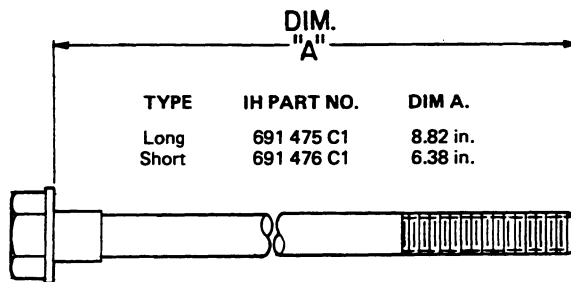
“New Style” Cylinder Head Bolt (Flange type) (Washer not required)
